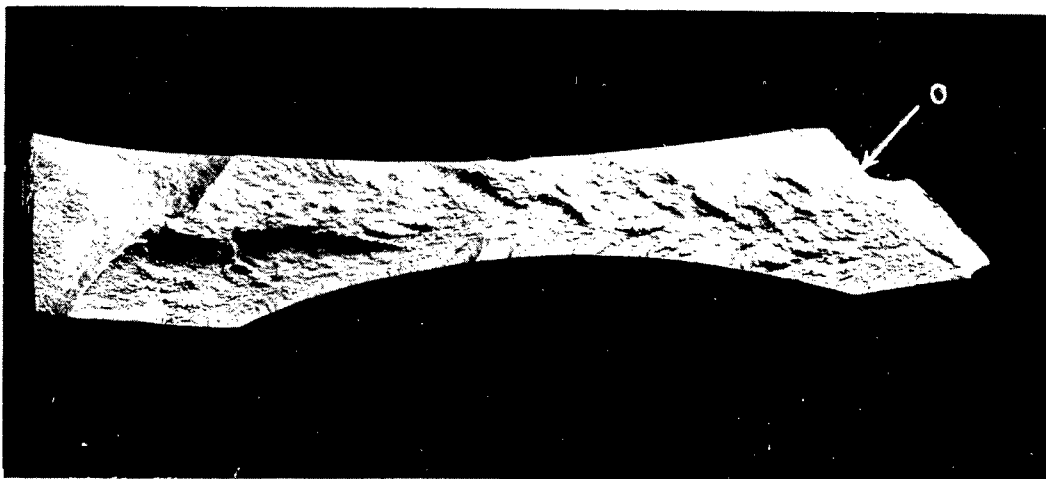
Appearance of fractured surface: note arrowhead markings pointing to origin of fracture 0 ($\frac{1}{2} \times$)
